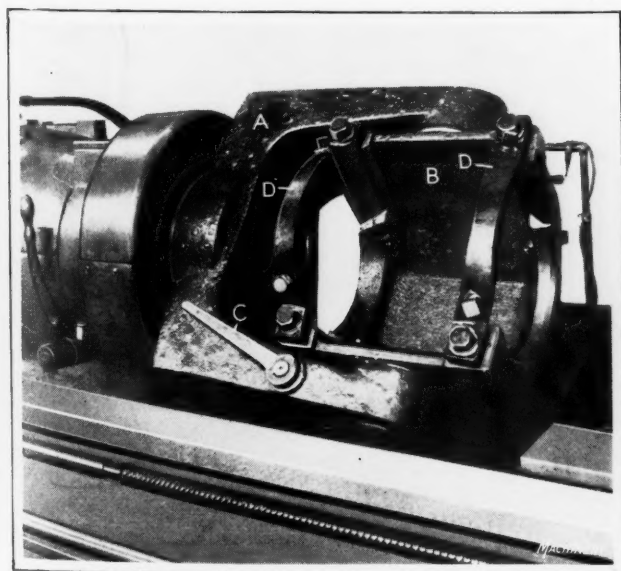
Chuck which may be indexed to bring the Three Flanges of a Valve into Position for Machining
